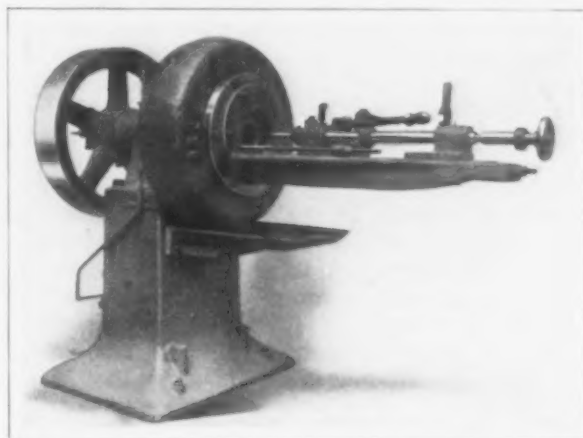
Special Swaging Machine for Forming Thin Tubing
